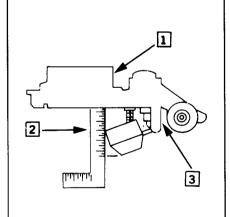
FIG. C FLOAT ASSEMBLY DETAIL VIEW
